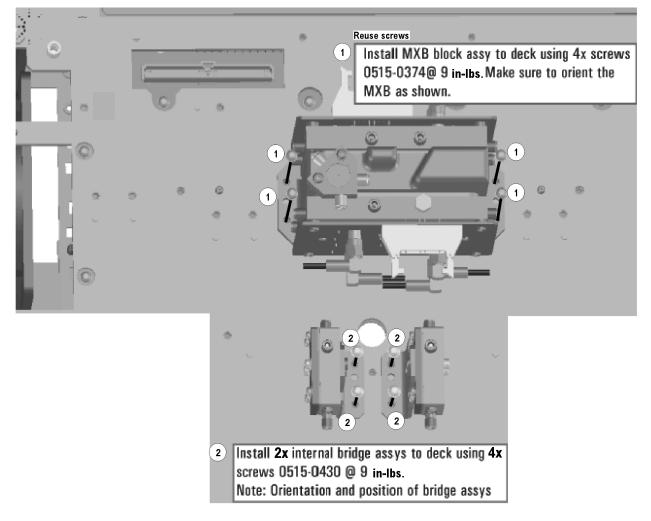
A26 and A27 Test Port Bridge Assembly (0515-1410, 5087-7757, N5242-60006)
